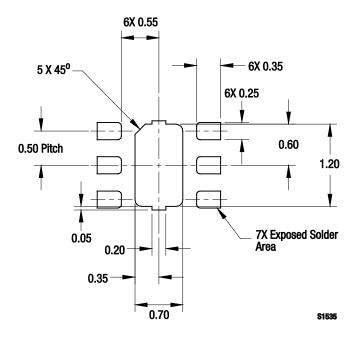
SKY13319-374LF PCB Layout Footprint (Top View)
